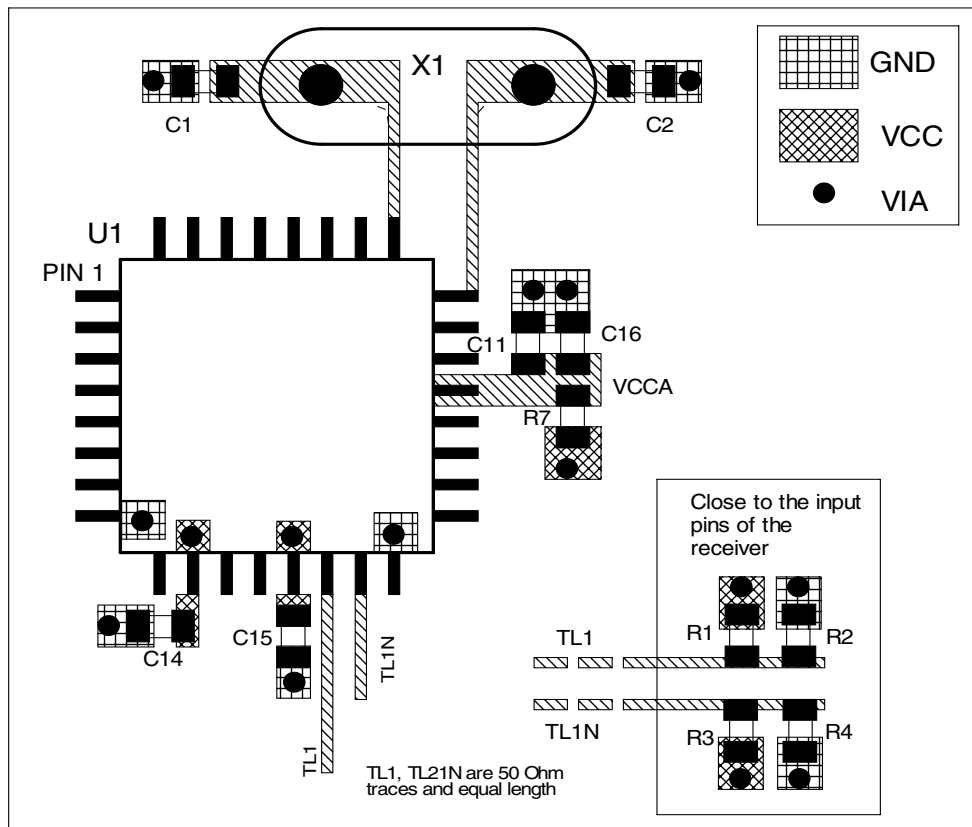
B. PCB BOARD LAYOUT FOR ICS843020-01
